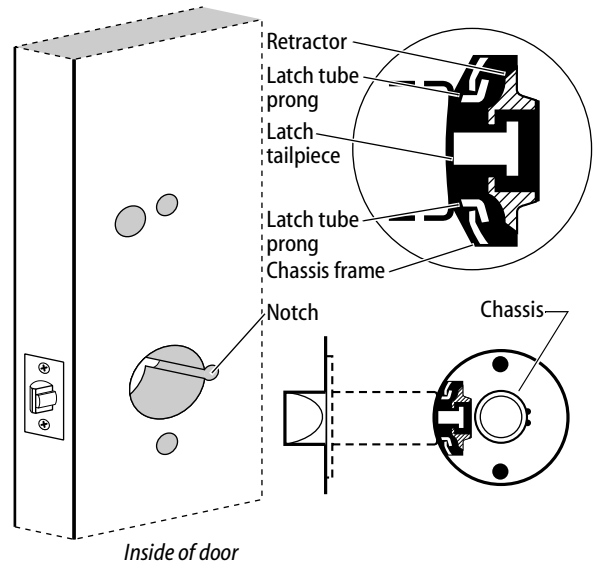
Installing the lock chassis and engaging the retractor in the latch
